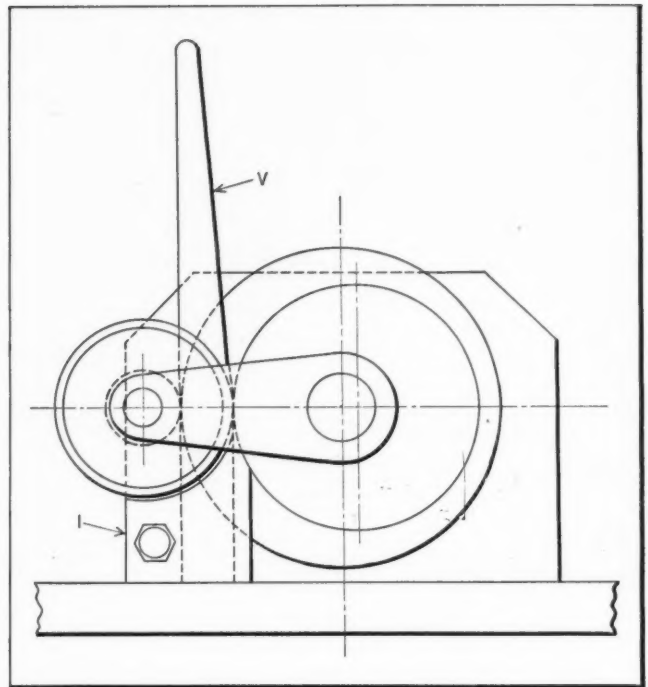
Fixture Shown in Fig. 1 with Work *V* in Position for Bending
